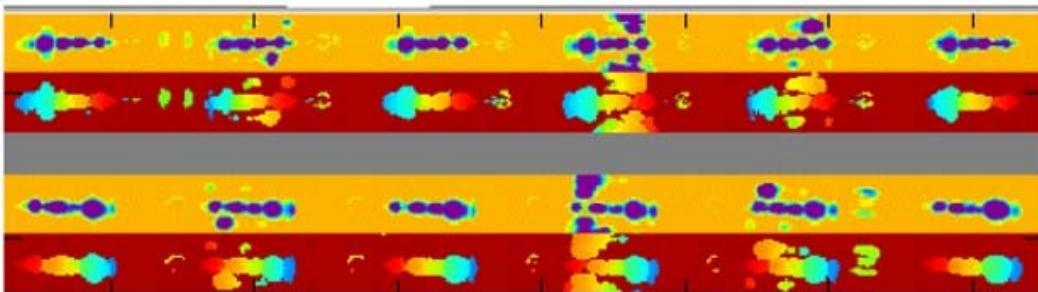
Ultrasonic C-scan image from inspecting the wing plank/stringer flange set-up sample
